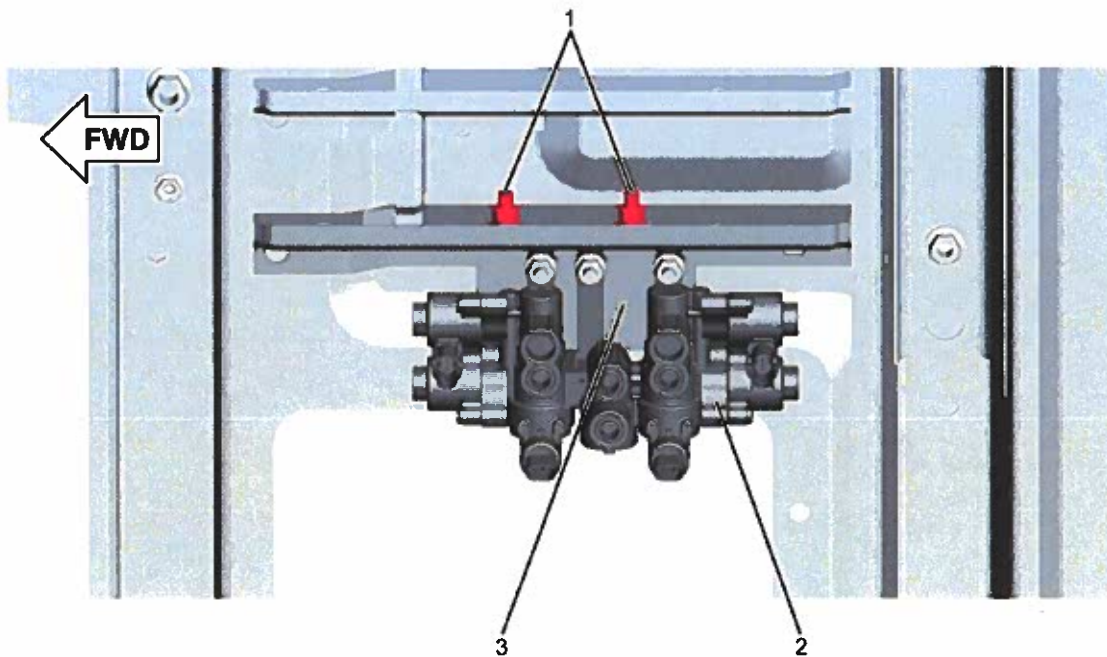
HV Heavy Duty Park Valve Module and Mounting Bracket
